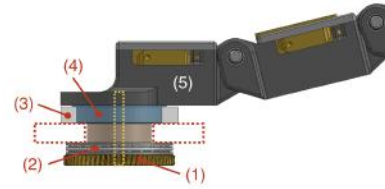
Rotary finger base design: (1) worm gear; (2) thrust bearing; (3) compact cross-roller bearing (transparent mode); (4) finger base adapting plate; (5) finger base phalanx. The rectangular areas with dotted line show the solid part of the palm wall pinched by the finger base assembly.
